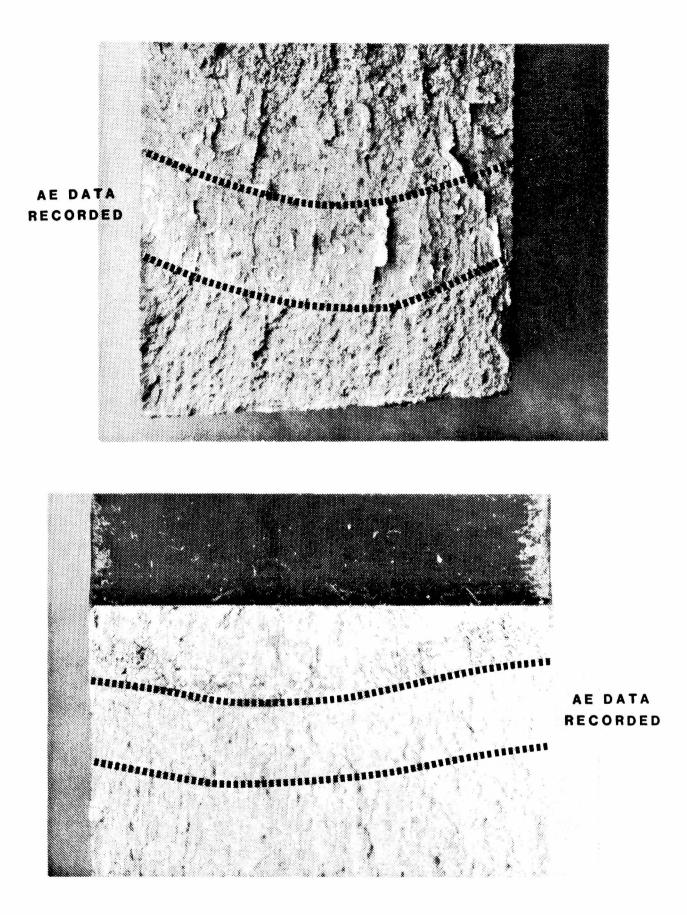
Fracture surface of 7039 DCB stress corrosion cracking specimen (top) contrasted with fracture surface of 7039 CT tensile loading specimen (bottom).
